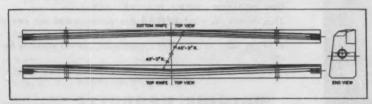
Top and bottom knives of rotary crop shear with large radius at leading edge ground to compound angles on machine shown in Fig. 1
